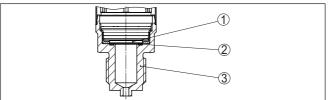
Recessed installation of the measuring cell (example: thread G½ (EN 837), manometer connection)
